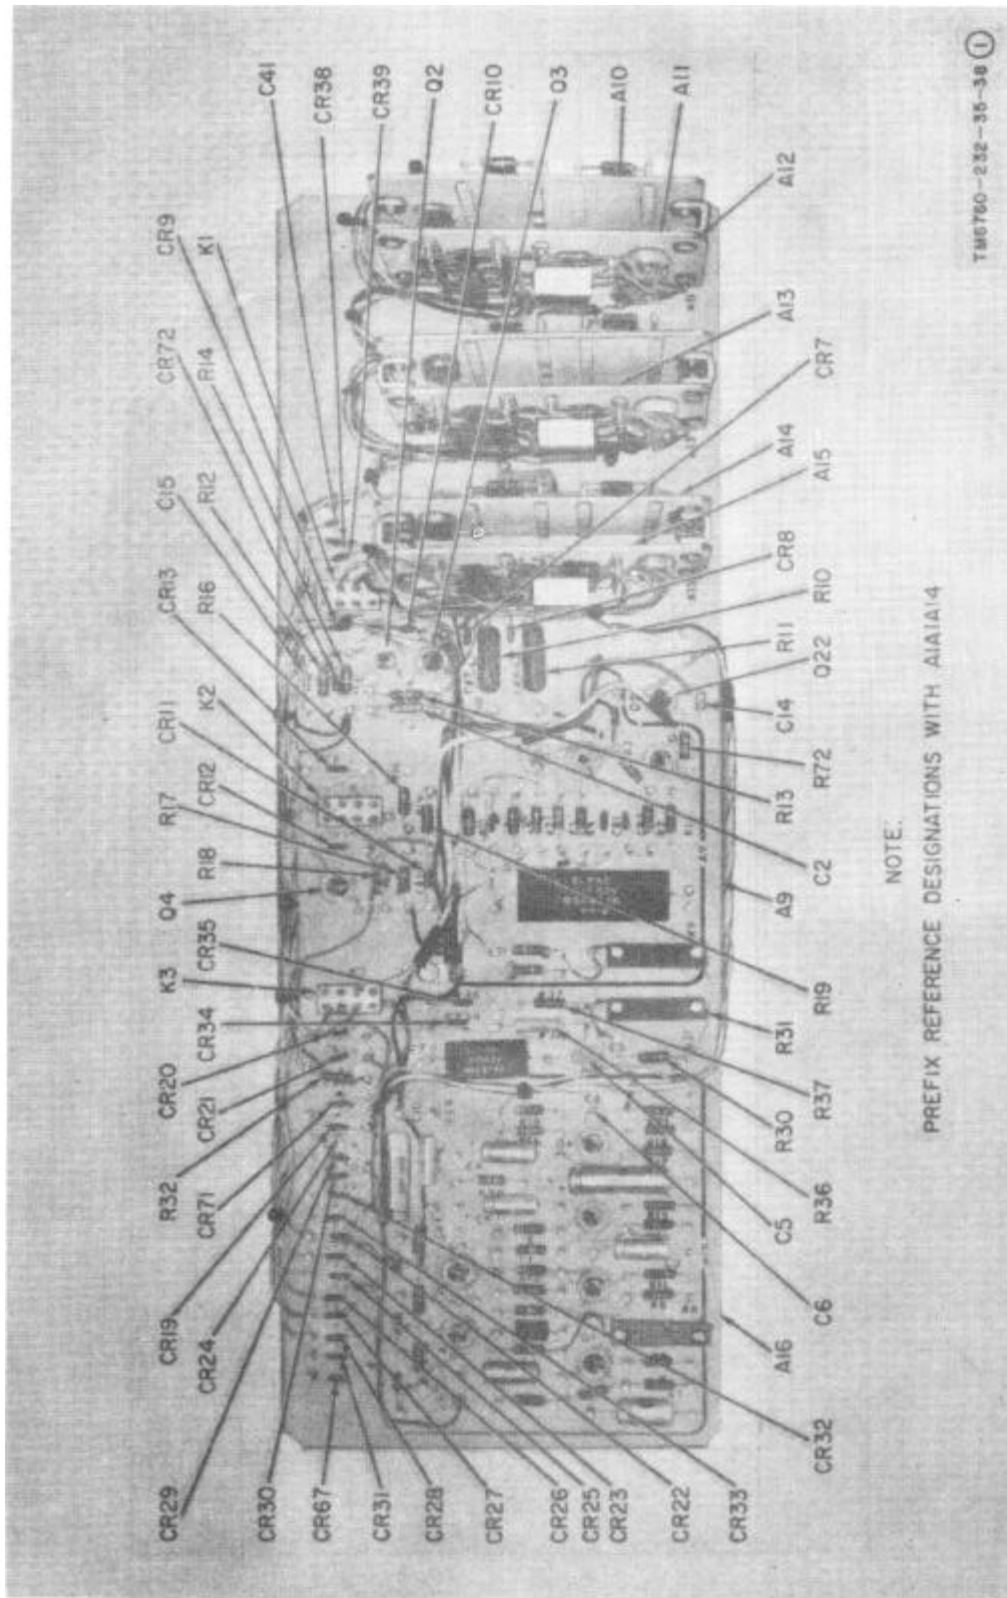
(1). Function chassis and component assembly A1A1A14, location of parts, (part 1 of 2).
